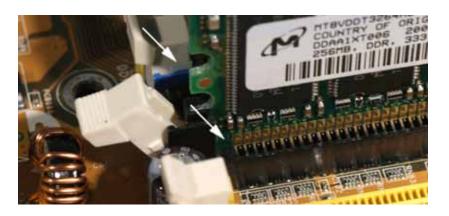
Step 3b - Visually Inspect the Alignment Notches in the Socket
